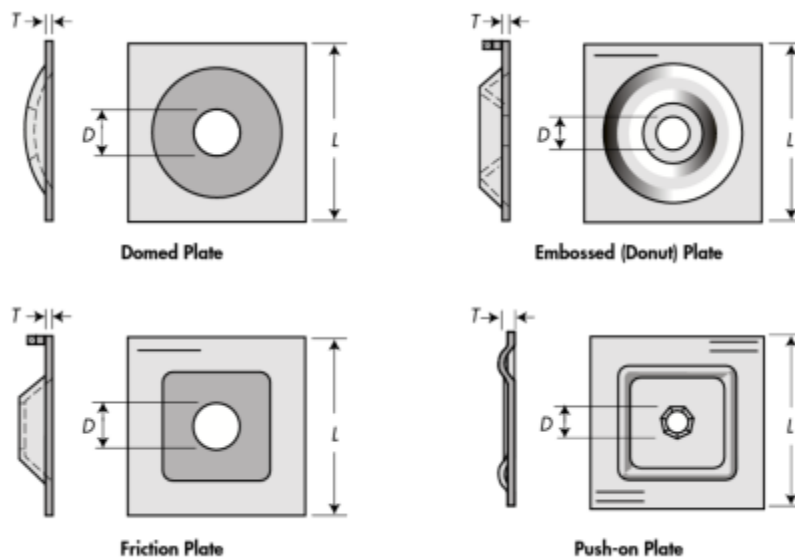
Common Types of Bolt Plates Used to Install Mesh (Hadjigeorgiou & Potvin, 2011, p. 577)
